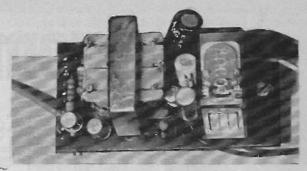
The receiver component board. Shows the components mounted in position on the plain matrix board and wiring up details.
